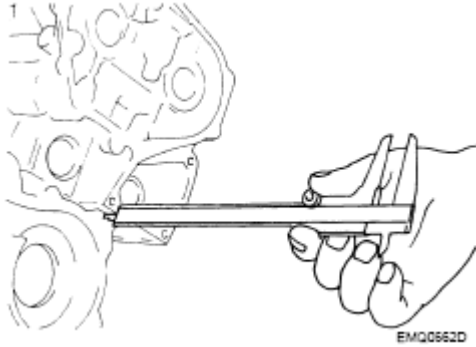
Measuring Distance Between Front End Faces Of Cylinder Block And Cylinder Head
